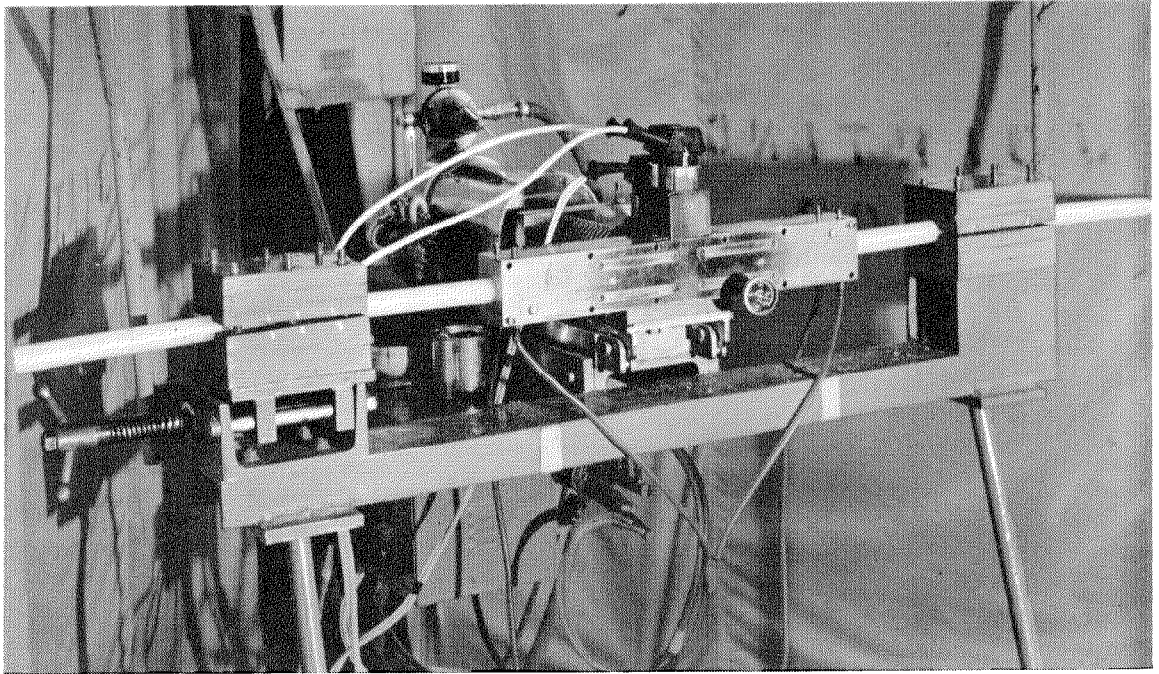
Machine for moulding polythene core in making cable joints. The mould is heated at the middle where the new polythene is to be applied and water cooled at the ends. A charge of polythene is driven by a compressed-air gun into the stainless-steel mould, where it welds perfectly with the existing cores.
